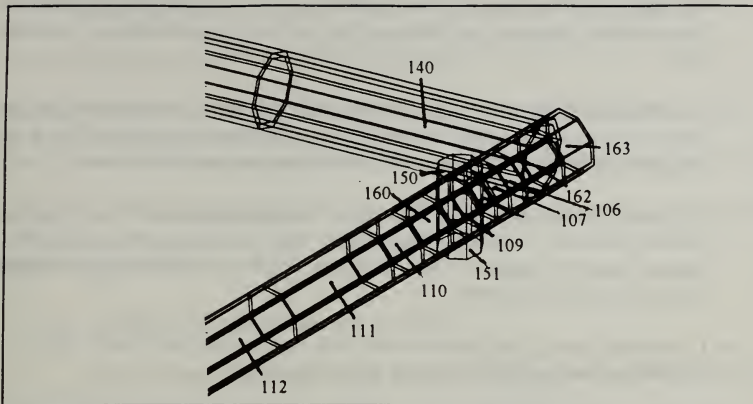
Attachment Point of Left Longitudinal Tube and Torque Tube
